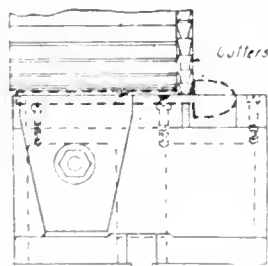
MILLING FRONT FORMED EDGE OF HILT
